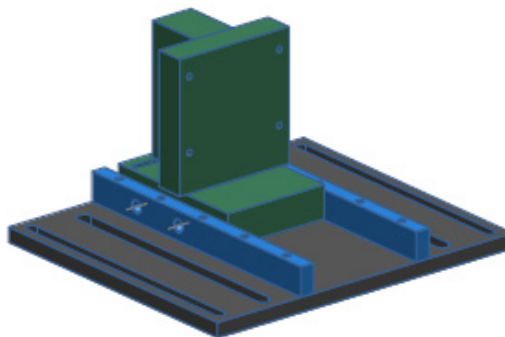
CAD model of motor mount and motor mount adjustment plate.
